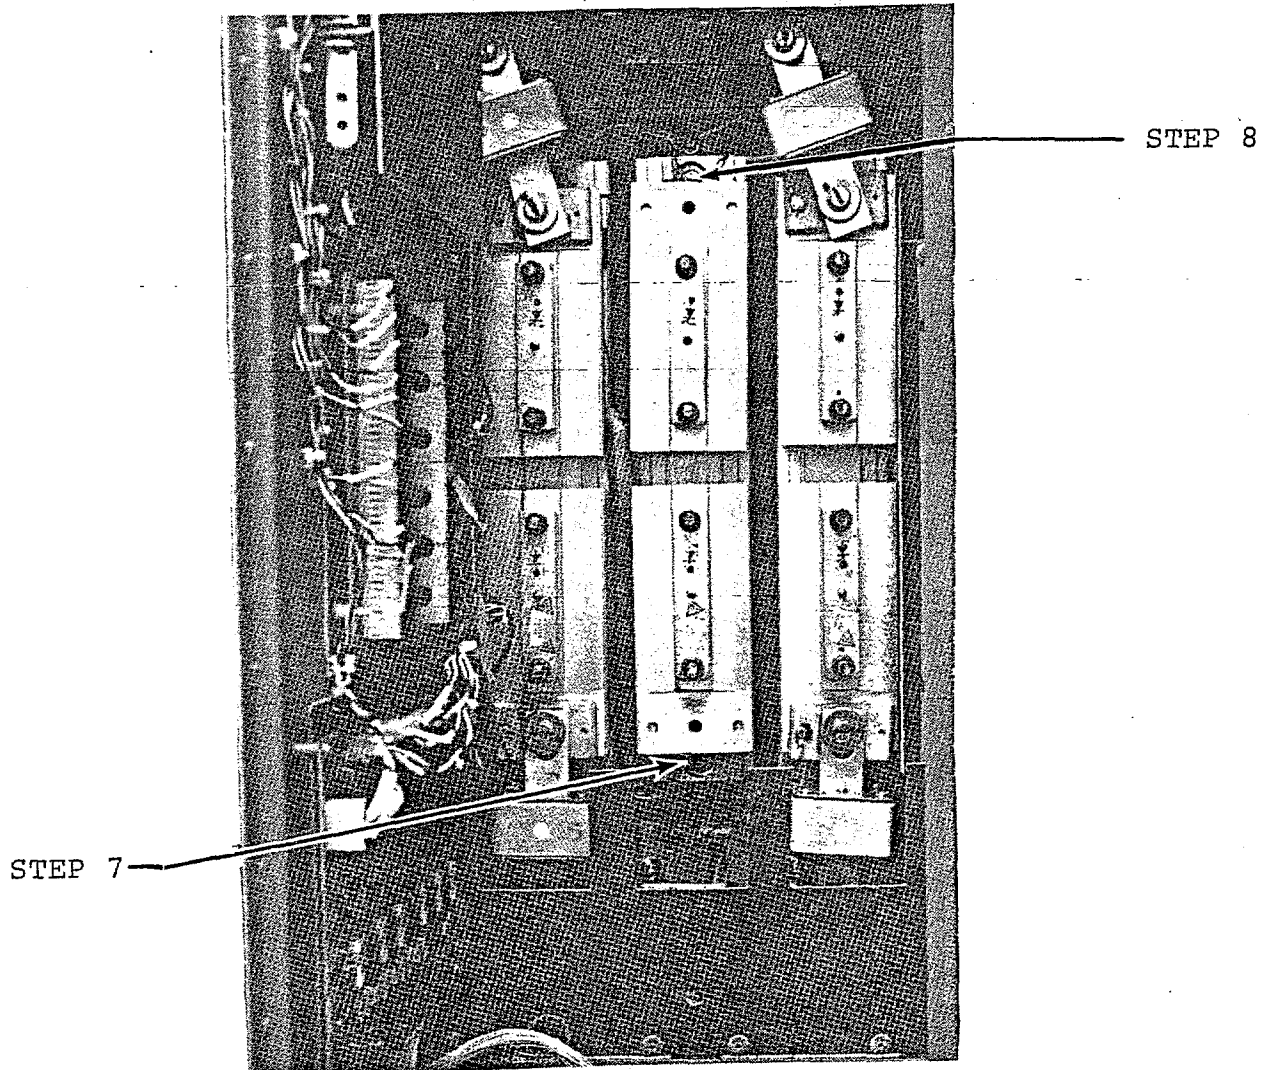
PCM CELL STACK ASSEMBLY READY TO BE REMOVED
